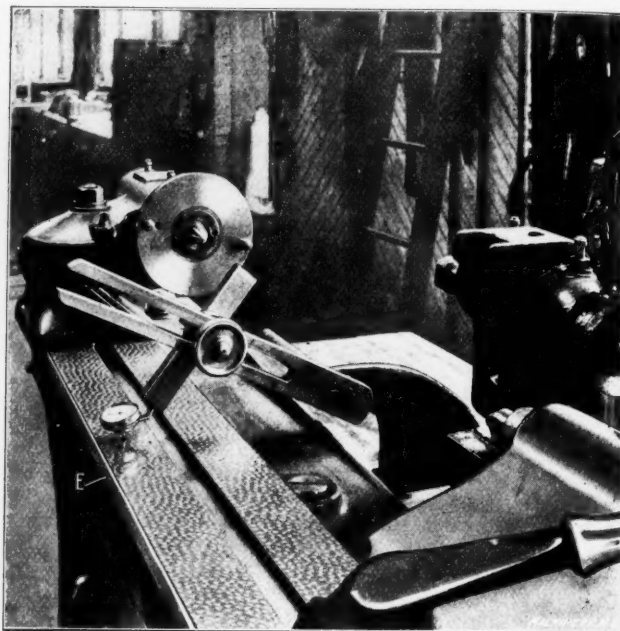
Testing Top of Platen with Reference to Wheel Carriage Travel
